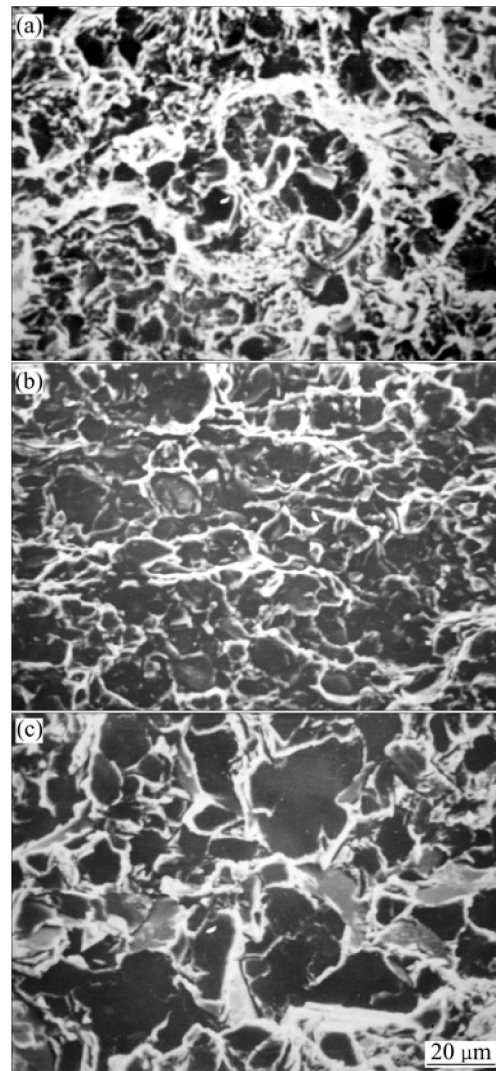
SEM fractographs of EB welds metal and as-received composite: (a) As-received composite; (b) 36 J/mm weld; (c) 48 J/mm weld
